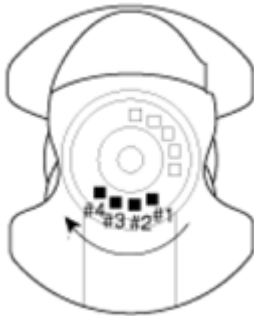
Crankshaft Pin Mark Location Discrimination Of Crankshaft
